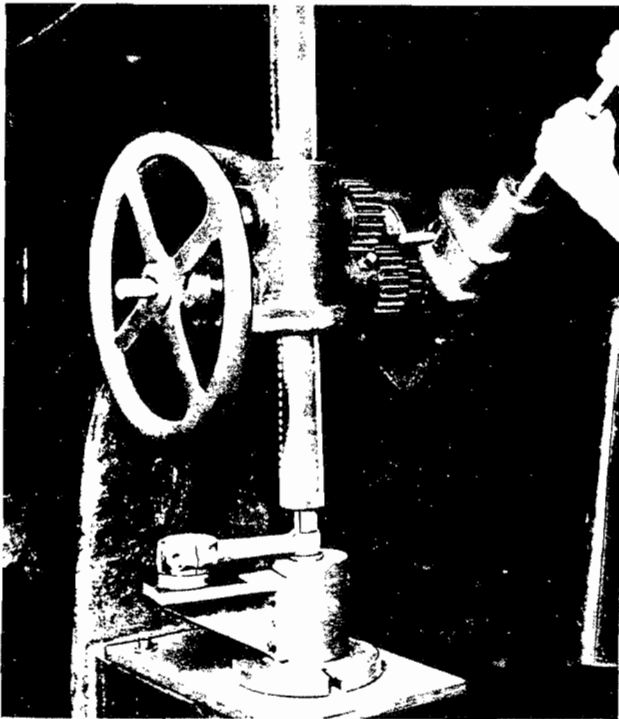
INSTALLING CONNECTING ROD BUSHING.
